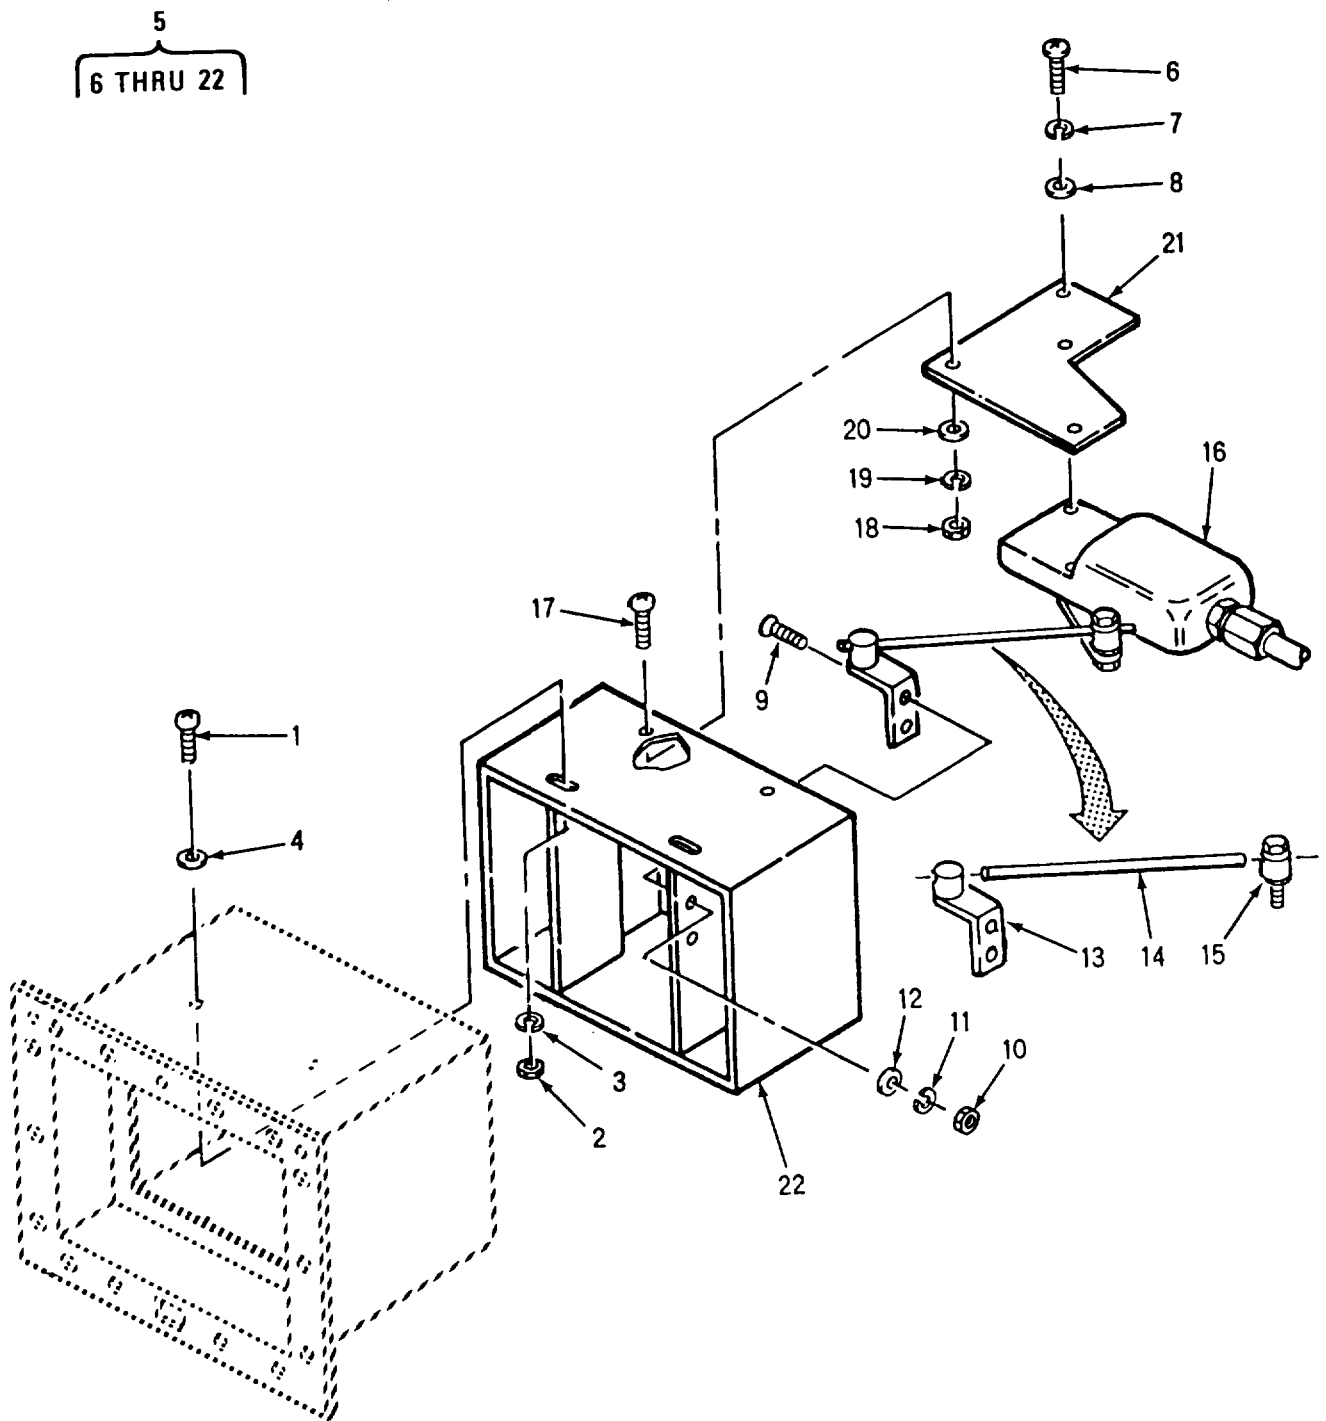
Purge Port Damper Motors (Sheet 1 of 2)
